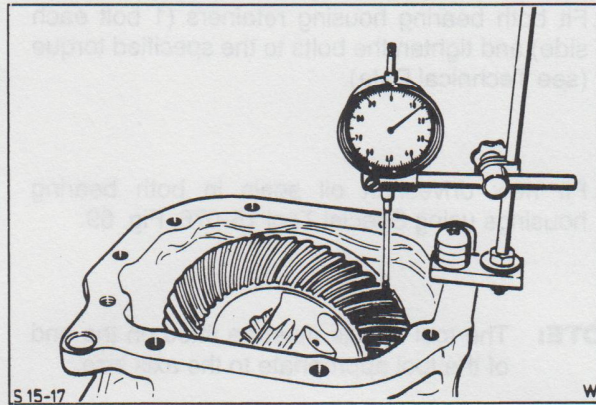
Position plunger of dial test indicator at right angles to crown wheel tooth.
